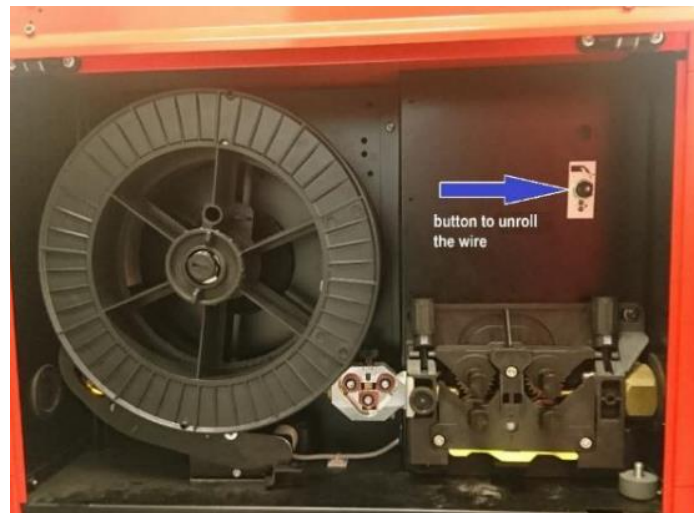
Press the button of the wire feeder until the wire gets to the end of that tube
